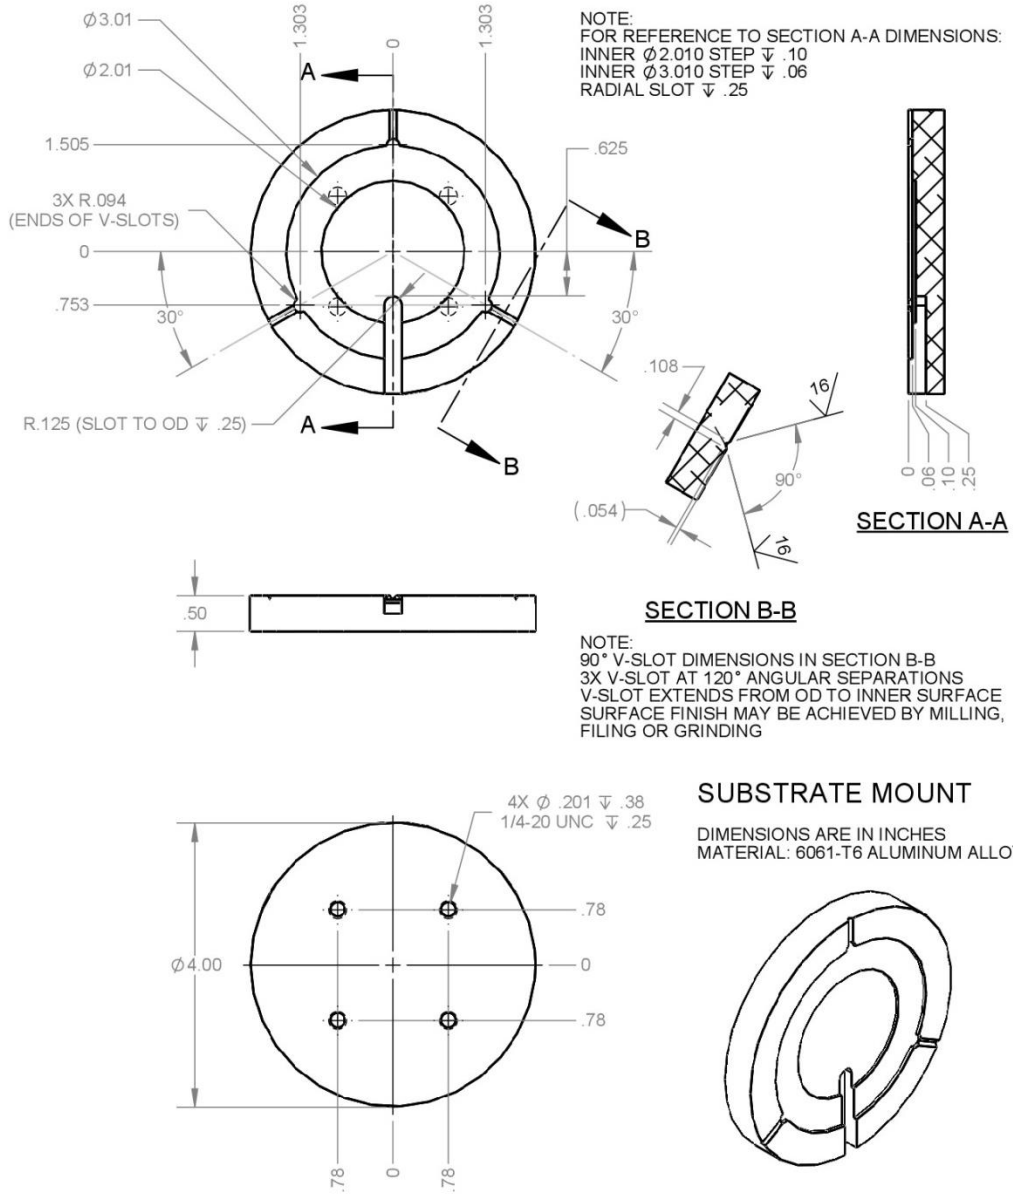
Mechanical drawing of the substrate mount for making Sample 5. The  $\phi 2.01$  inch recession was machined into a slot for holding Sample 6 at two locations.
